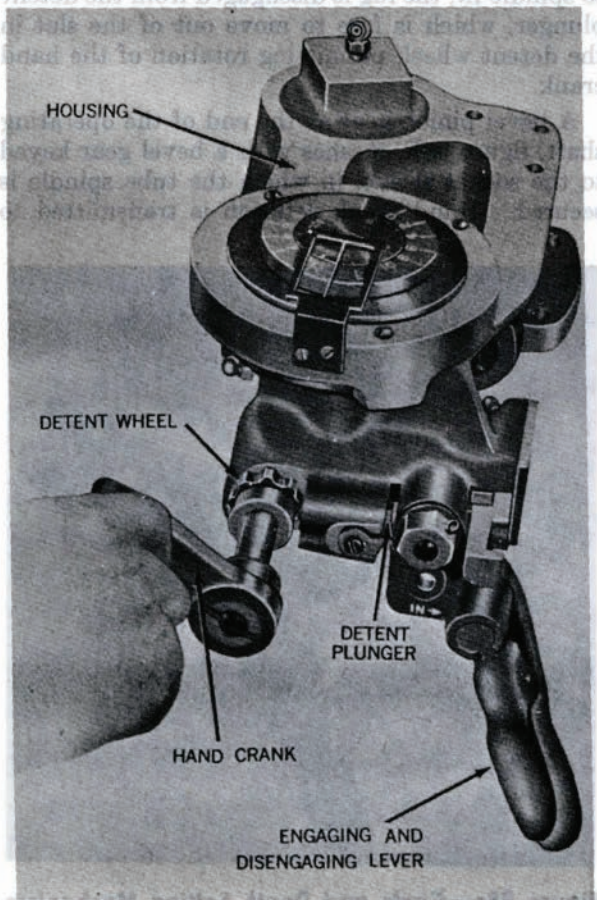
Circle and Depth Setting Mechanism, Lower Left-Hand Tubes, Making Setting.
